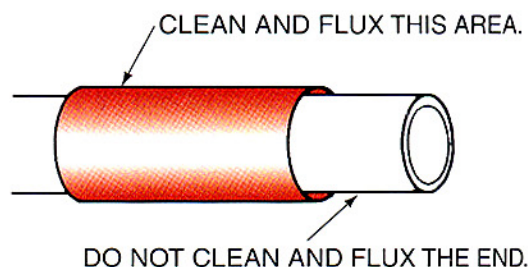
Application of flux to a capillary tube to prevent solder from entering the tube.
